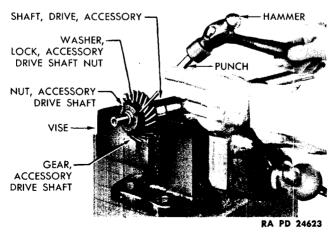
Bending Tabs Of Accessory Drive Shaft Nut Lock Washer
